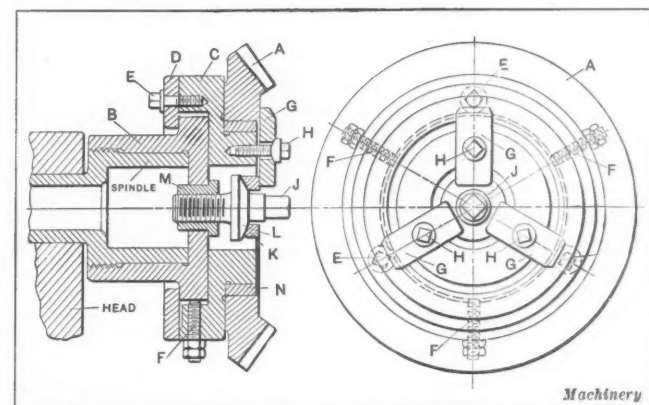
Ring Bevel Gear holding Fixture provided with Adjustable Clamps
